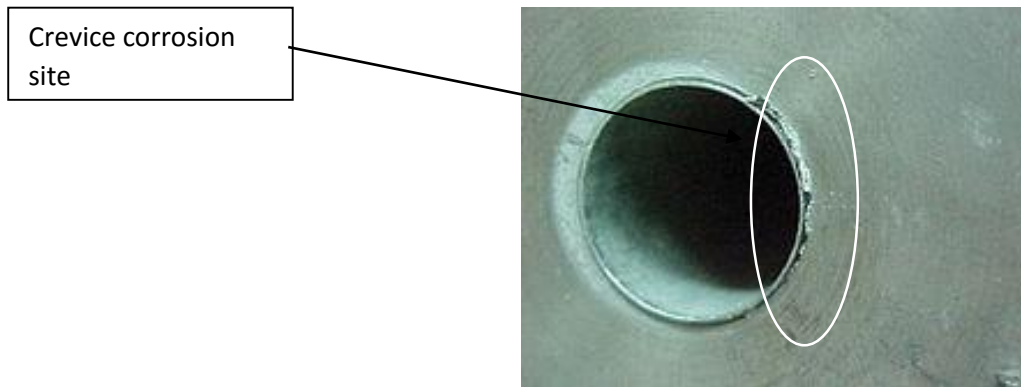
Corrosion in the crevice between the tube and tube sheet (both made of type 316 stainless steel) [12]
